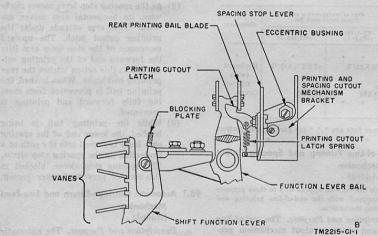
(Added) End-of-line printing and spacing cutout mechanism.
